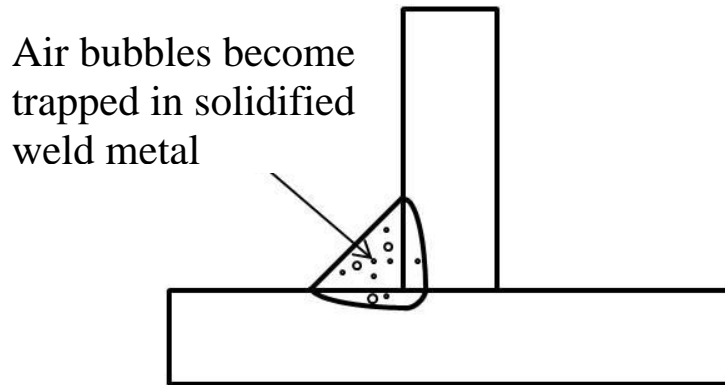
Porosity in Fillet Weld (Schematic)
